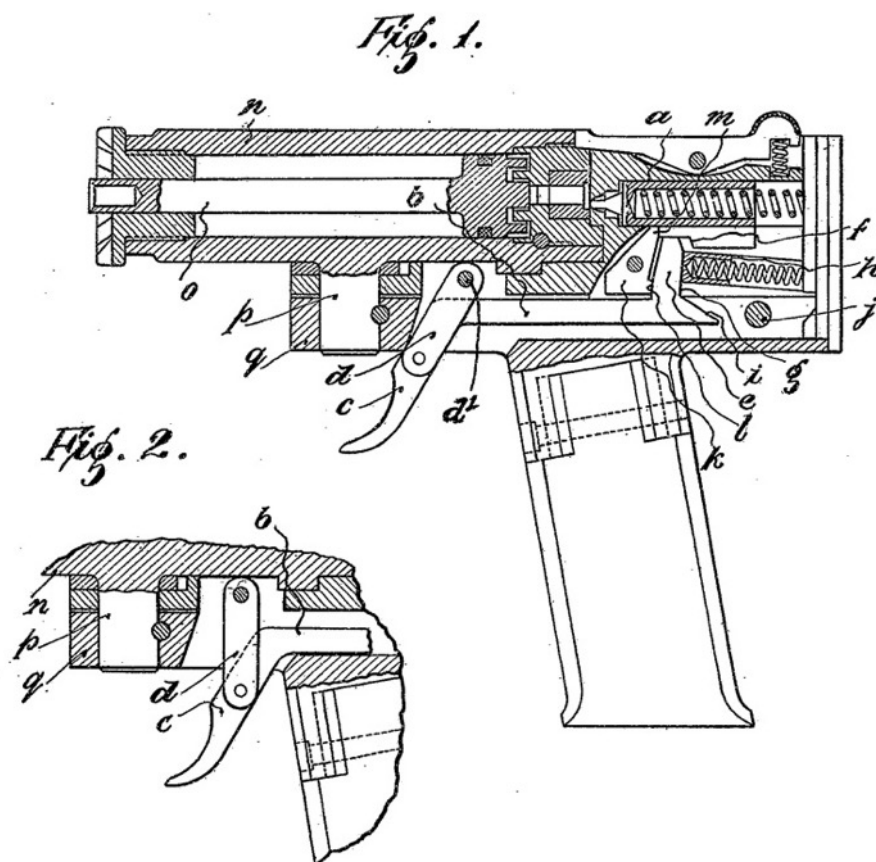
CASH model B 1929 Captive Bolt Pistol Patent Drawing
